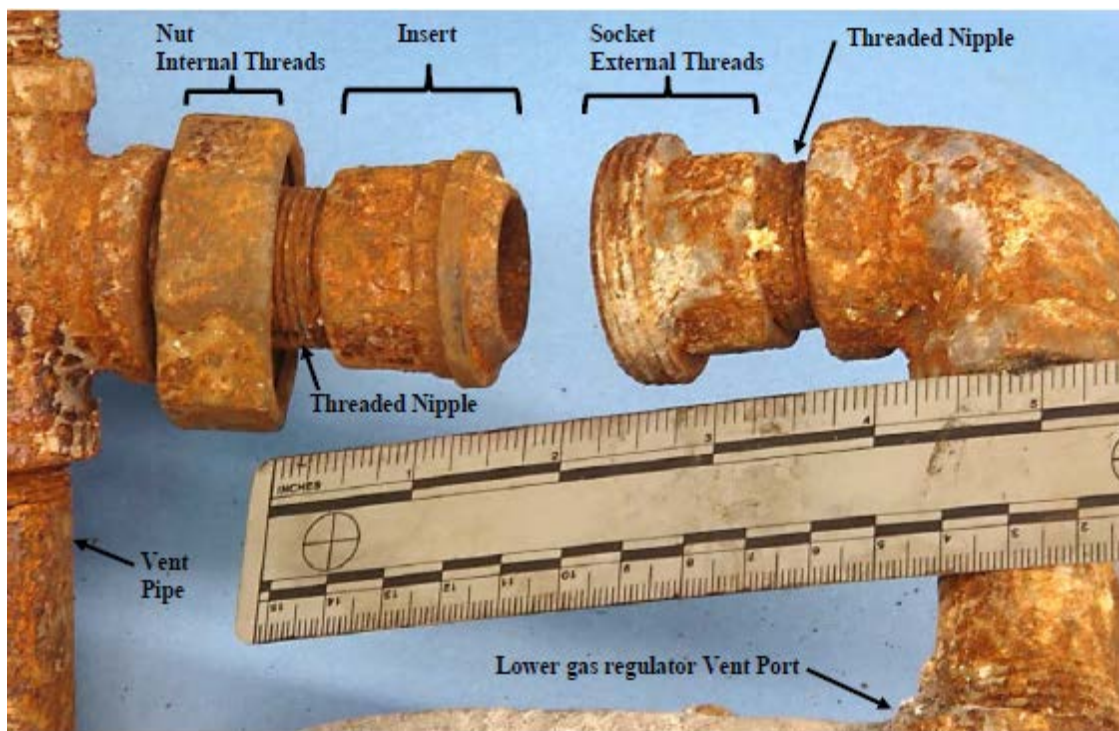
Photograph of the lower regulator union assembly parts (before cleaning).
